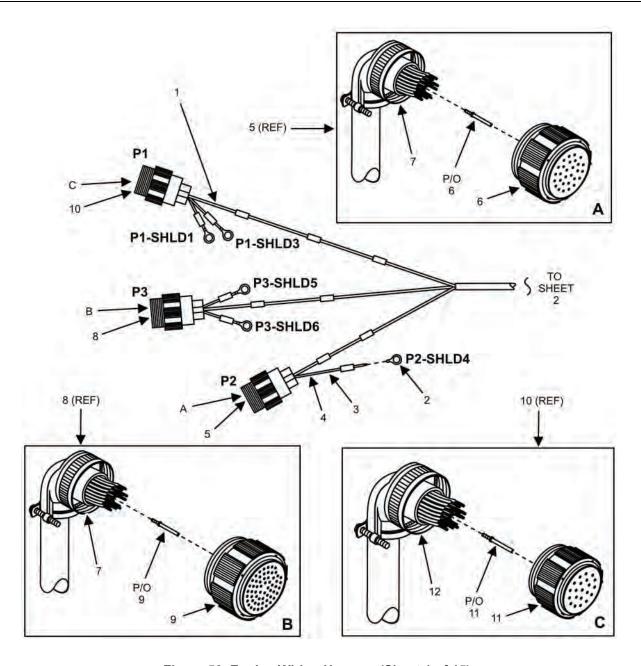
Engine Wiring Harness (Sheet 1 of 15).
